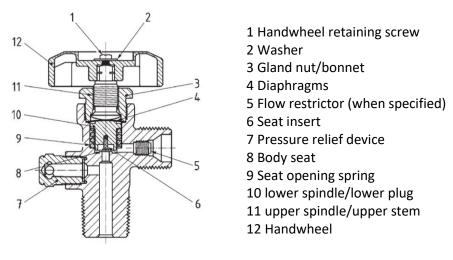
Diaphragm of a gland seal valve (non-metallic seal, handwheel operated) [5]
